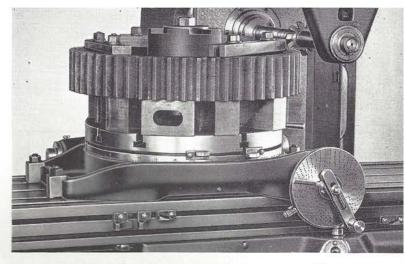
Milling the teeth of a large spur gear. The part is mounted on a Cincinnati Circular Milling Attachment, equipped with an auxiliary Indexing Attachment.
